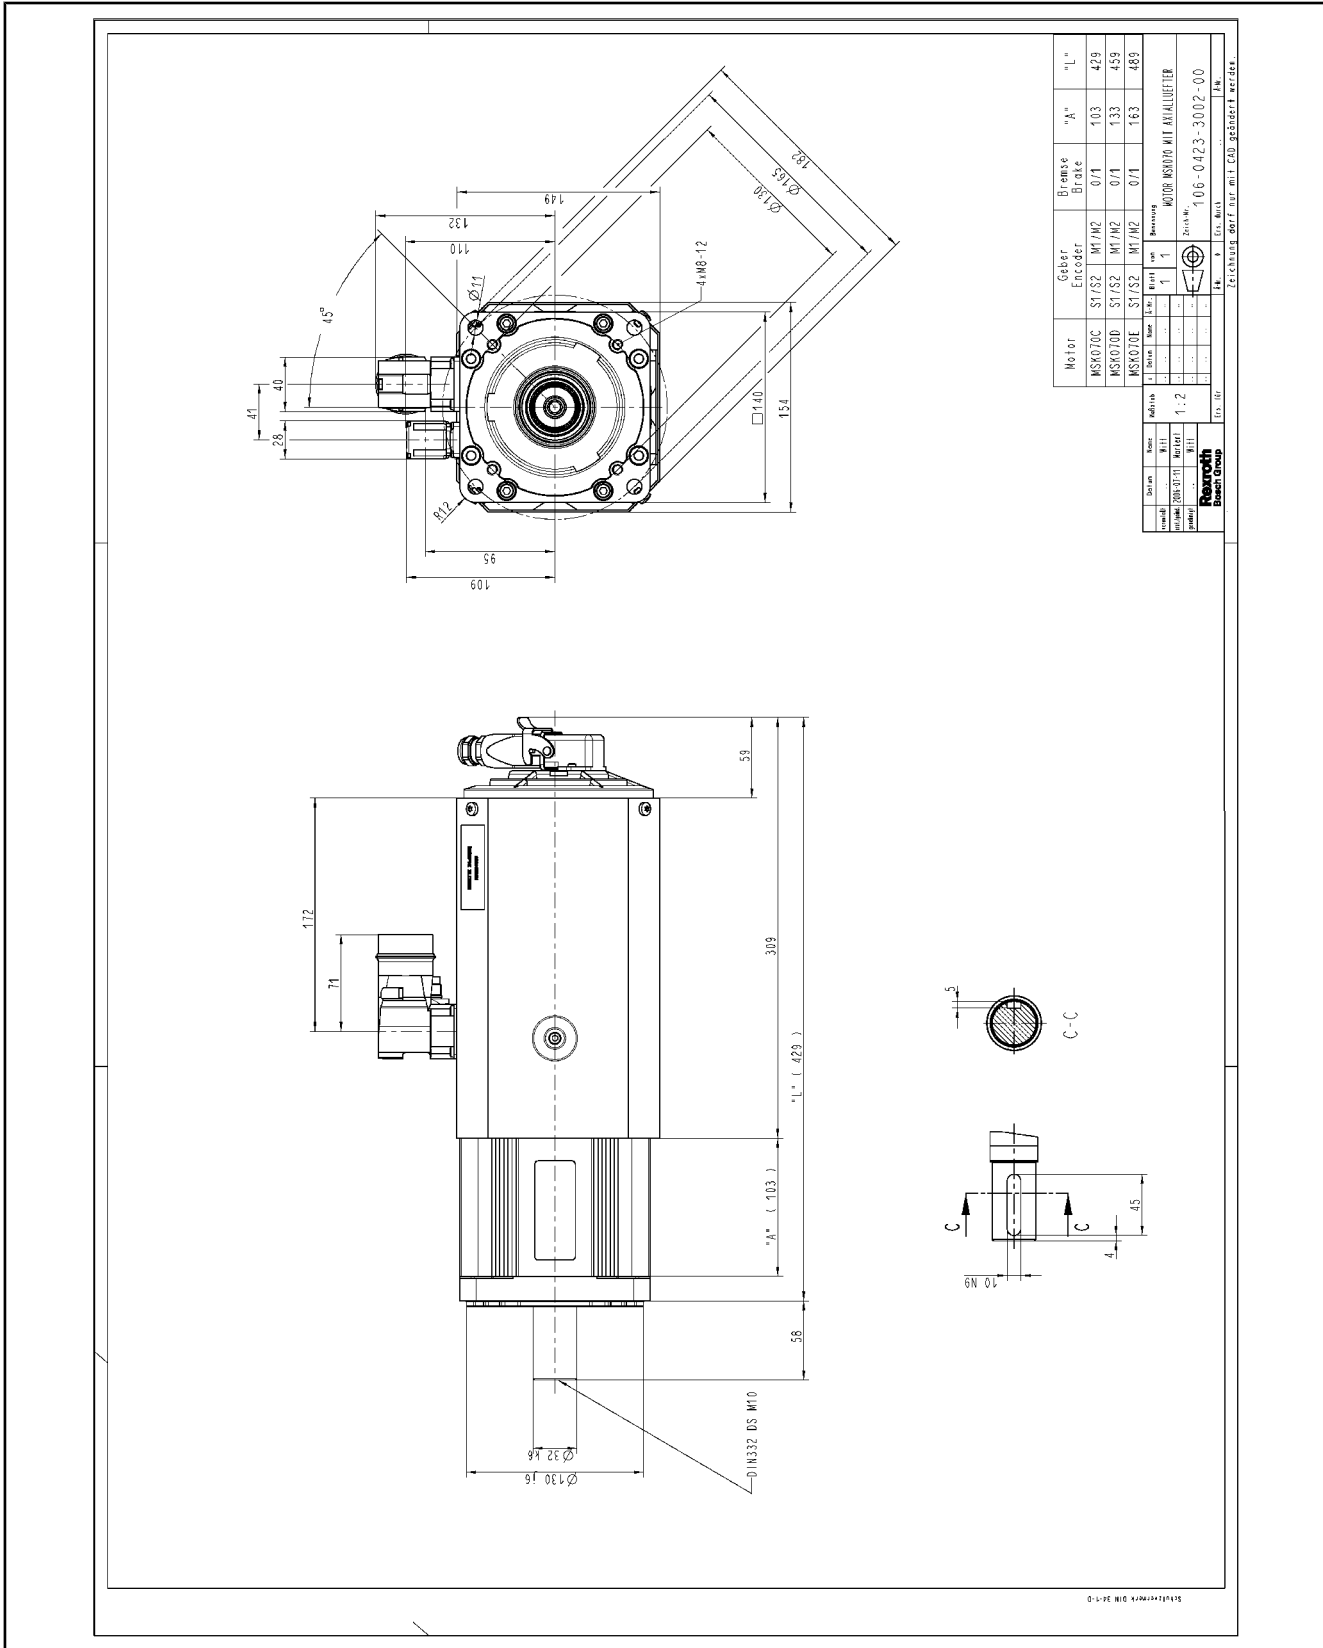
Dimension sheet MSK070 with axial fan unit
